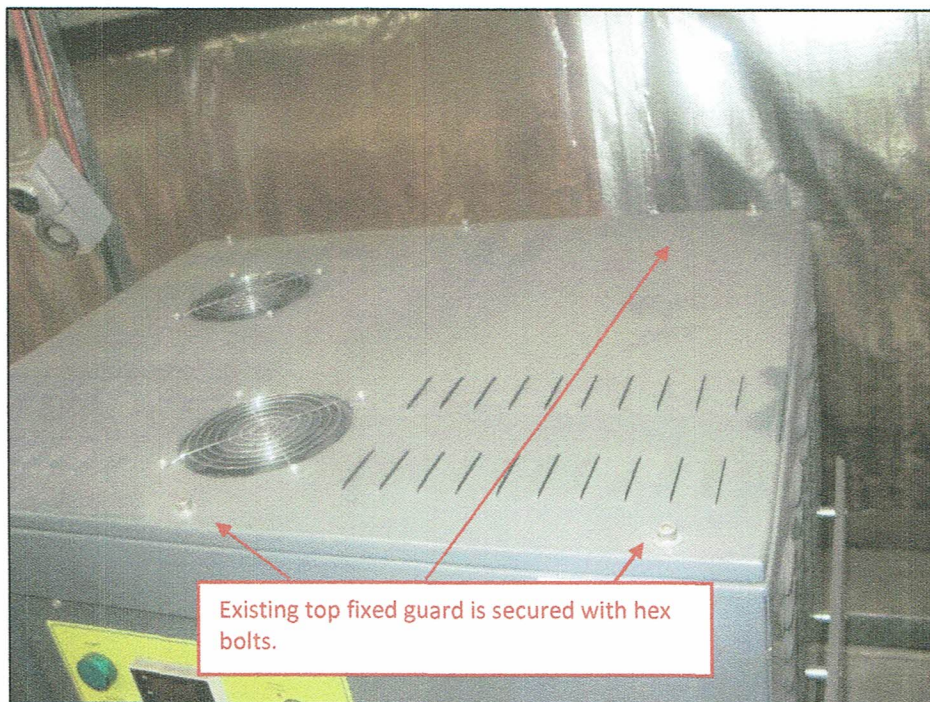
XEKL 455 MT: Fixed guards on top of heating tunnel
